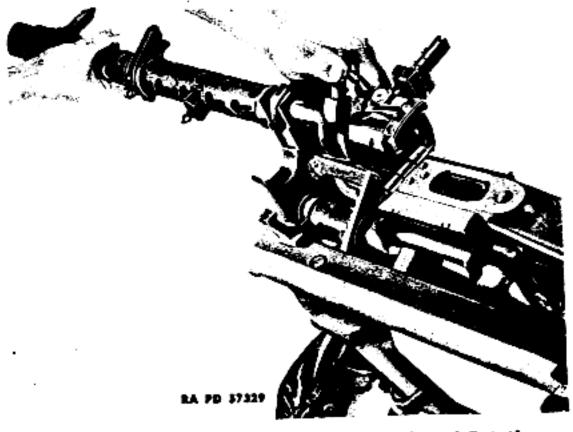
Unlocking of Receiver Catch and Rotating Barrel Casing
